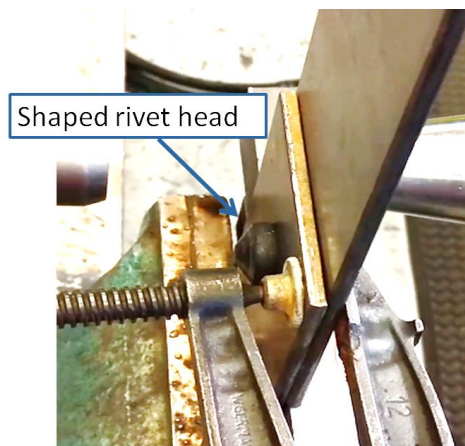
Step 2: Final application of riveting force resulting in the shaped rivet head
